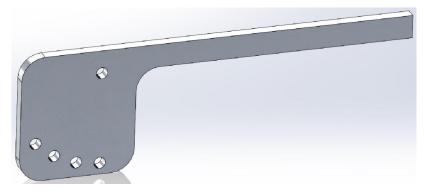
Steel knee flexion bracket. The top hole is for the rotational joint and the four holes at the bottom are for angle adjustment.
